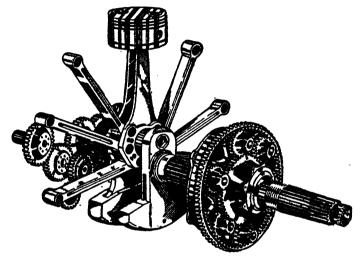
Internal mechanism of 7-cylinder radial engine—cylinders and crankcase removed; also 6 of the pistons—with planetary gear which drives propeller shaft
